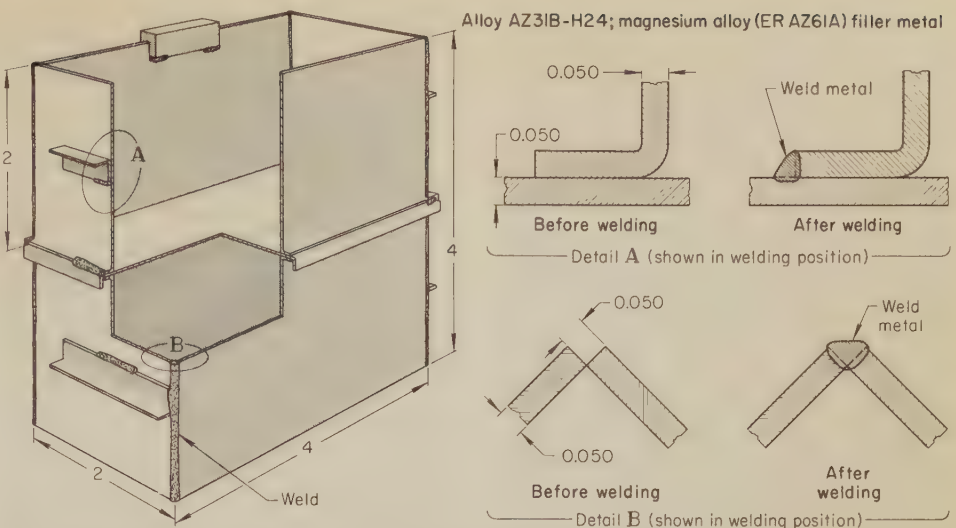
Two methods of welding magnesium alloys that help to prevent weld cracking
